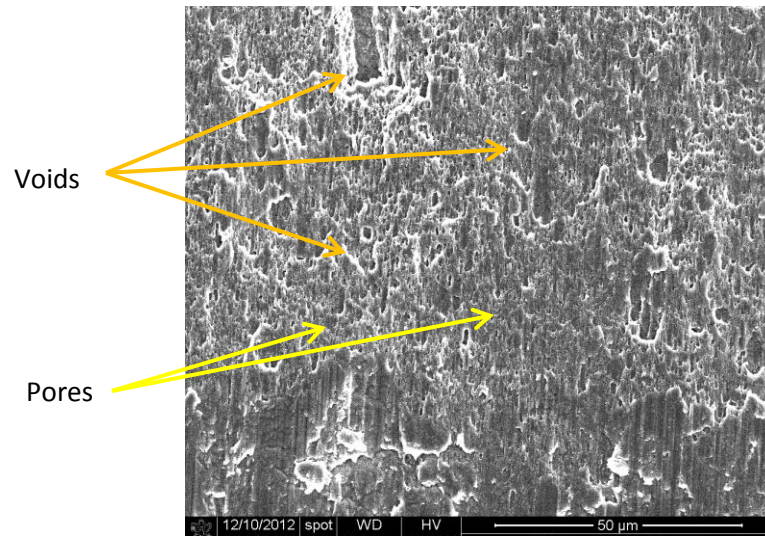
Fractography of a laser-welded lap shear coupon.
